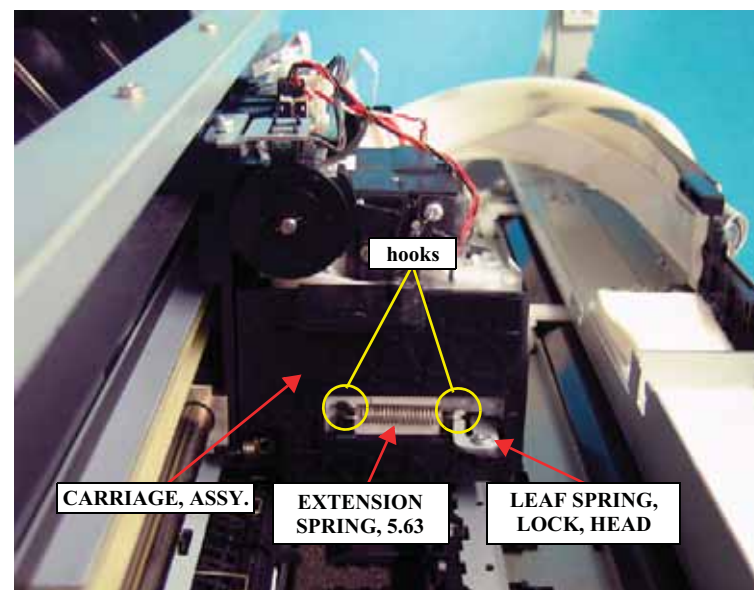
Removing the EXTENSION SPRING, 5.63
